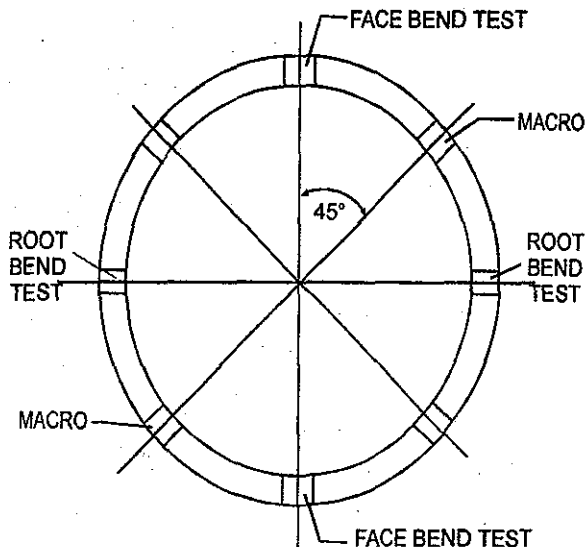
BRANCH WELD SPECIMEN FOR BRANCH PIPES
